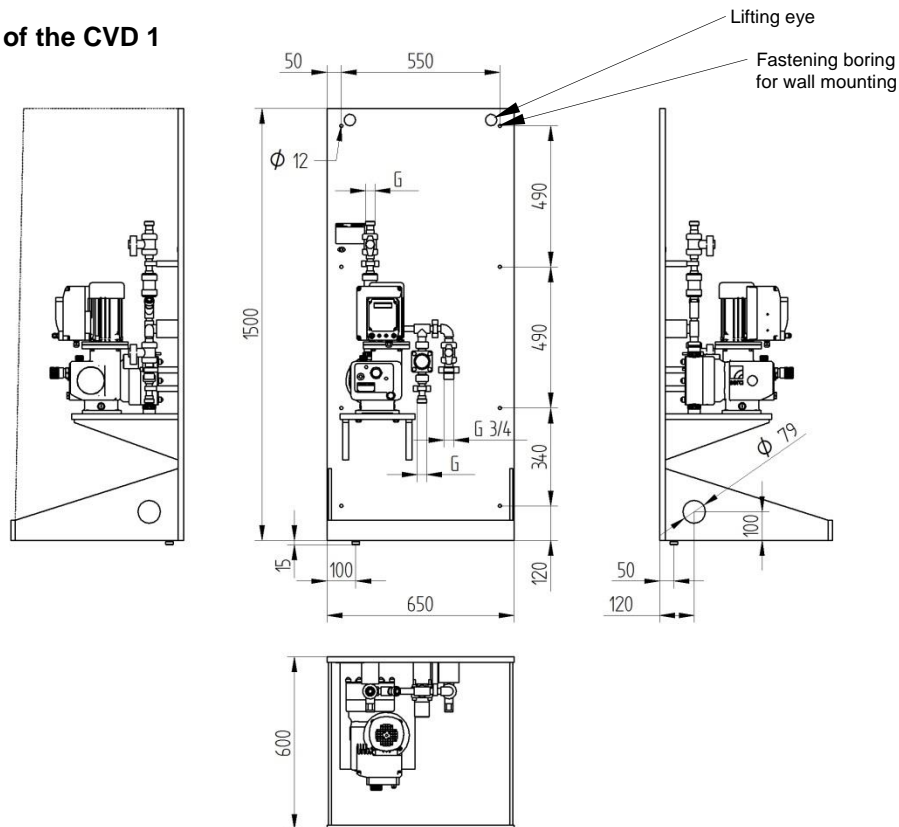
Dimensions of the CVD1 (wall mounting)
